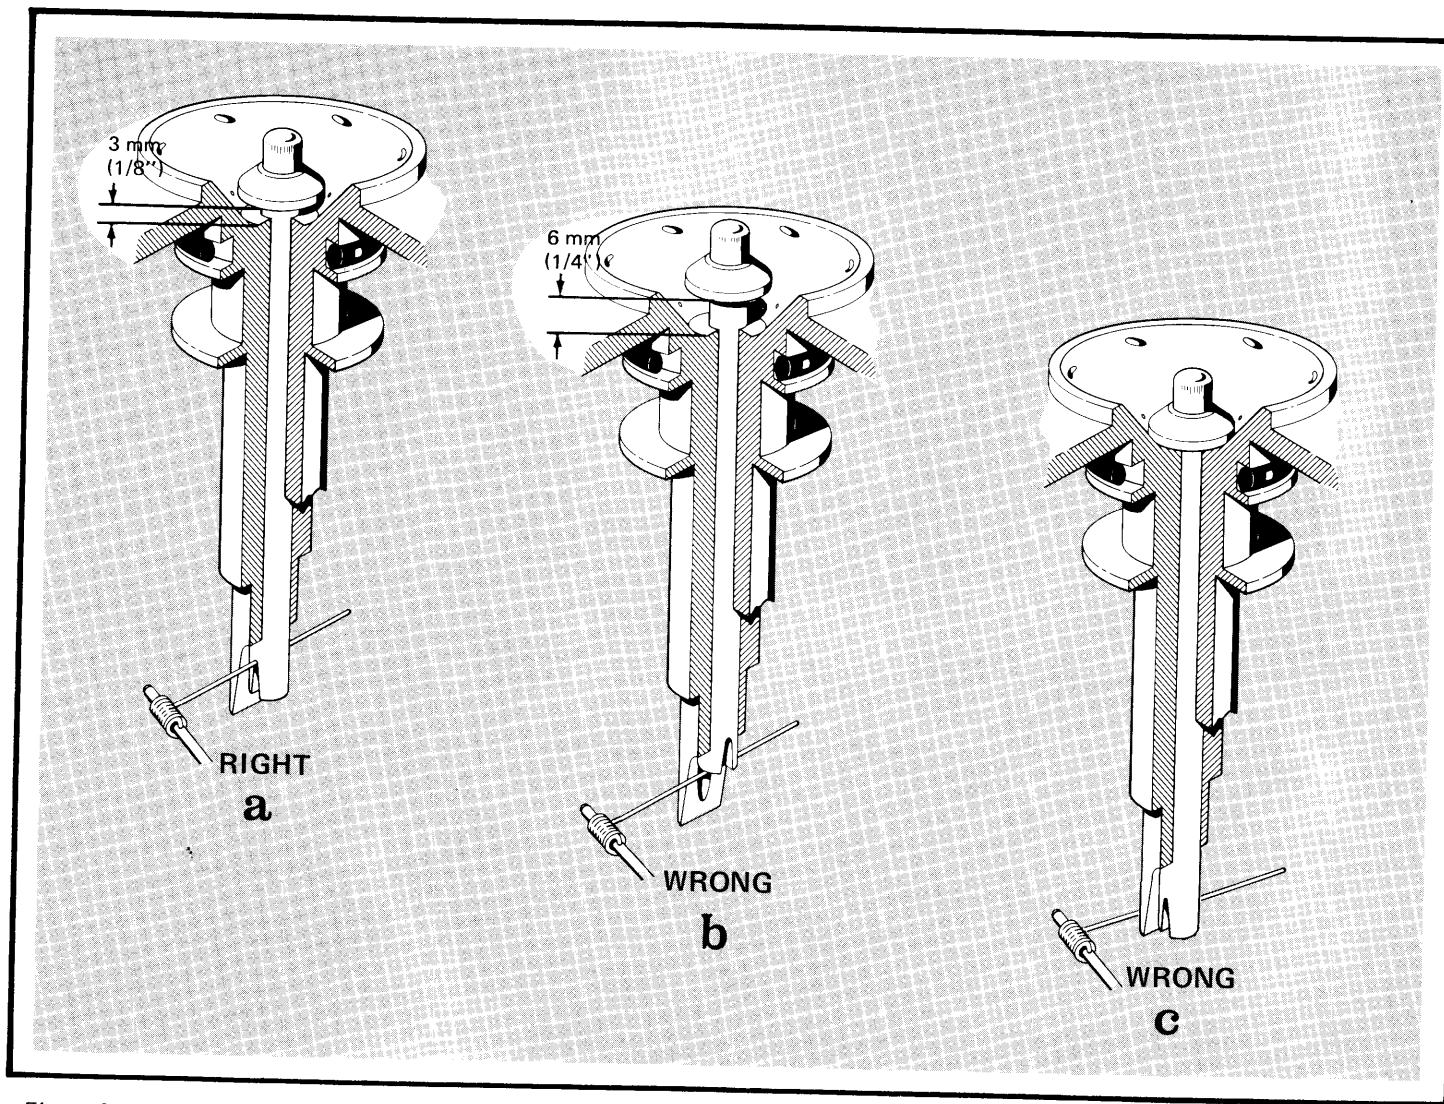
Pin Height, Right and Wrong. The bottom of the cone on the pin should be about 3 mm (1/8") above the stator surface when the pin is positioned correctly (a). If the pin rides on top of the wire instead of straddling it (b), the cone will be 6 mm (1/4") above the stator. For pins that repeatedly fall flat on the surface (c), see Troubleshooting on the last two pages.
